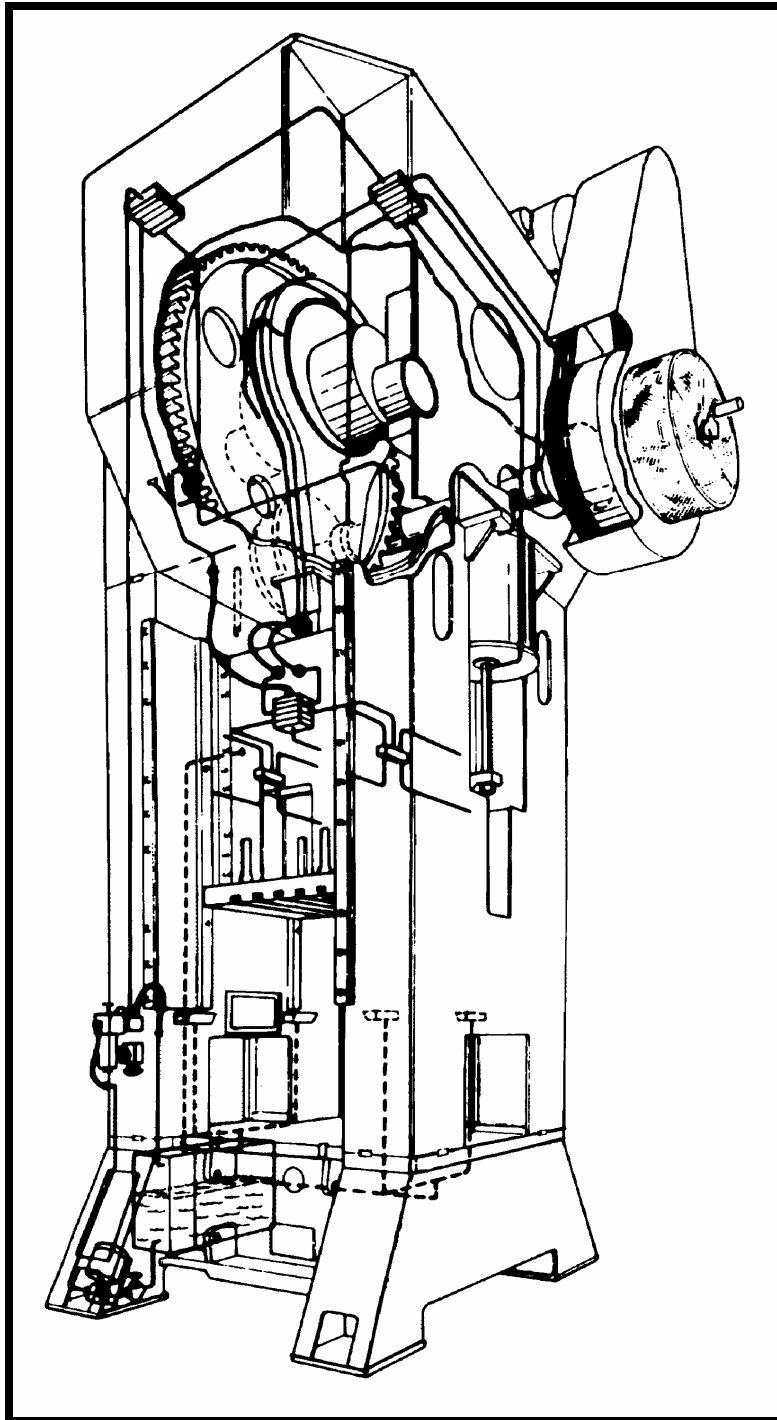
An example of a single-action, straitside, eccentric drive mechanical press designed for high force capacity and full tonnage available high in the stroke. Note the cascade lubrication system and double reduction gears in the press crown. *Verson Corporation
